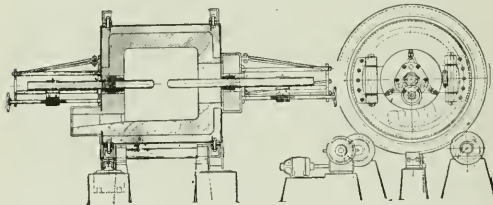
CROSS-SECTION OF BOOTH ROTATING FURNACE
